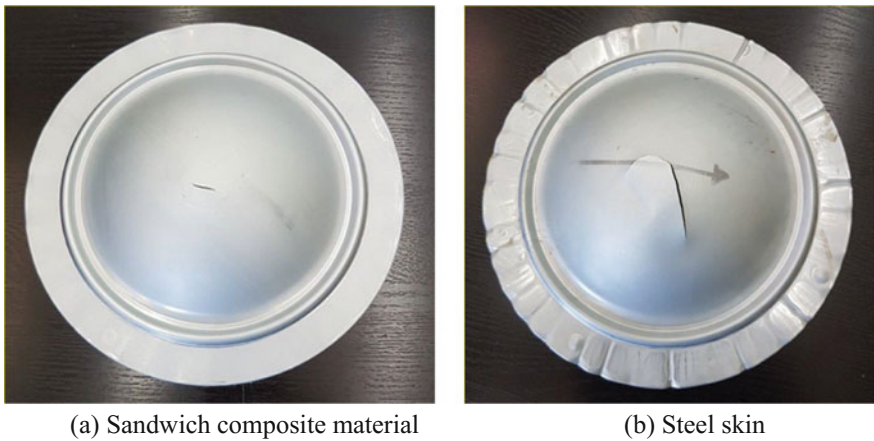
Detail of the fracture zone of deformed specimens in the hydraulic bulge test
